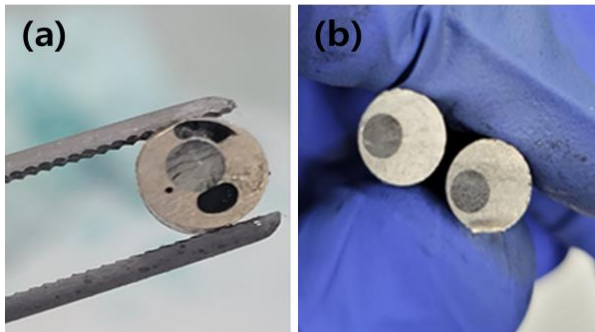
Cross sections of the fabricated annular fuel. (a) Fabricated under Ar condition, (b) Fabricated using #1 mold.
